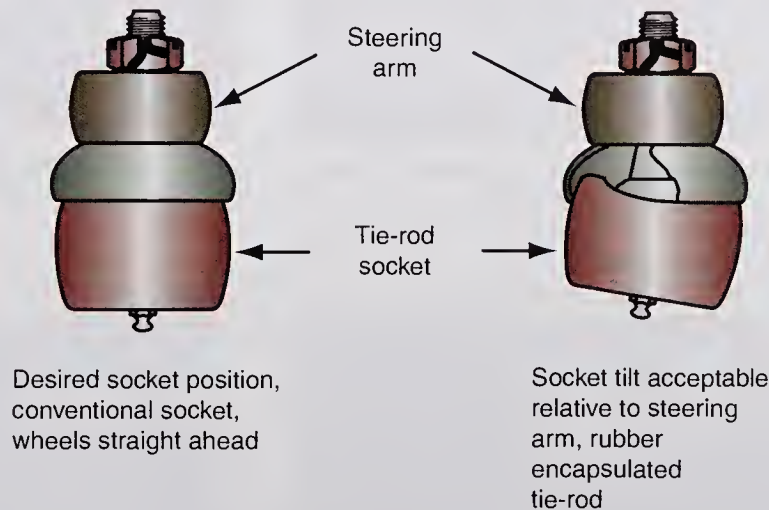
Rubber-encapsulated tie-rod end housing may be tilted to one side after it is installed and tightened.
